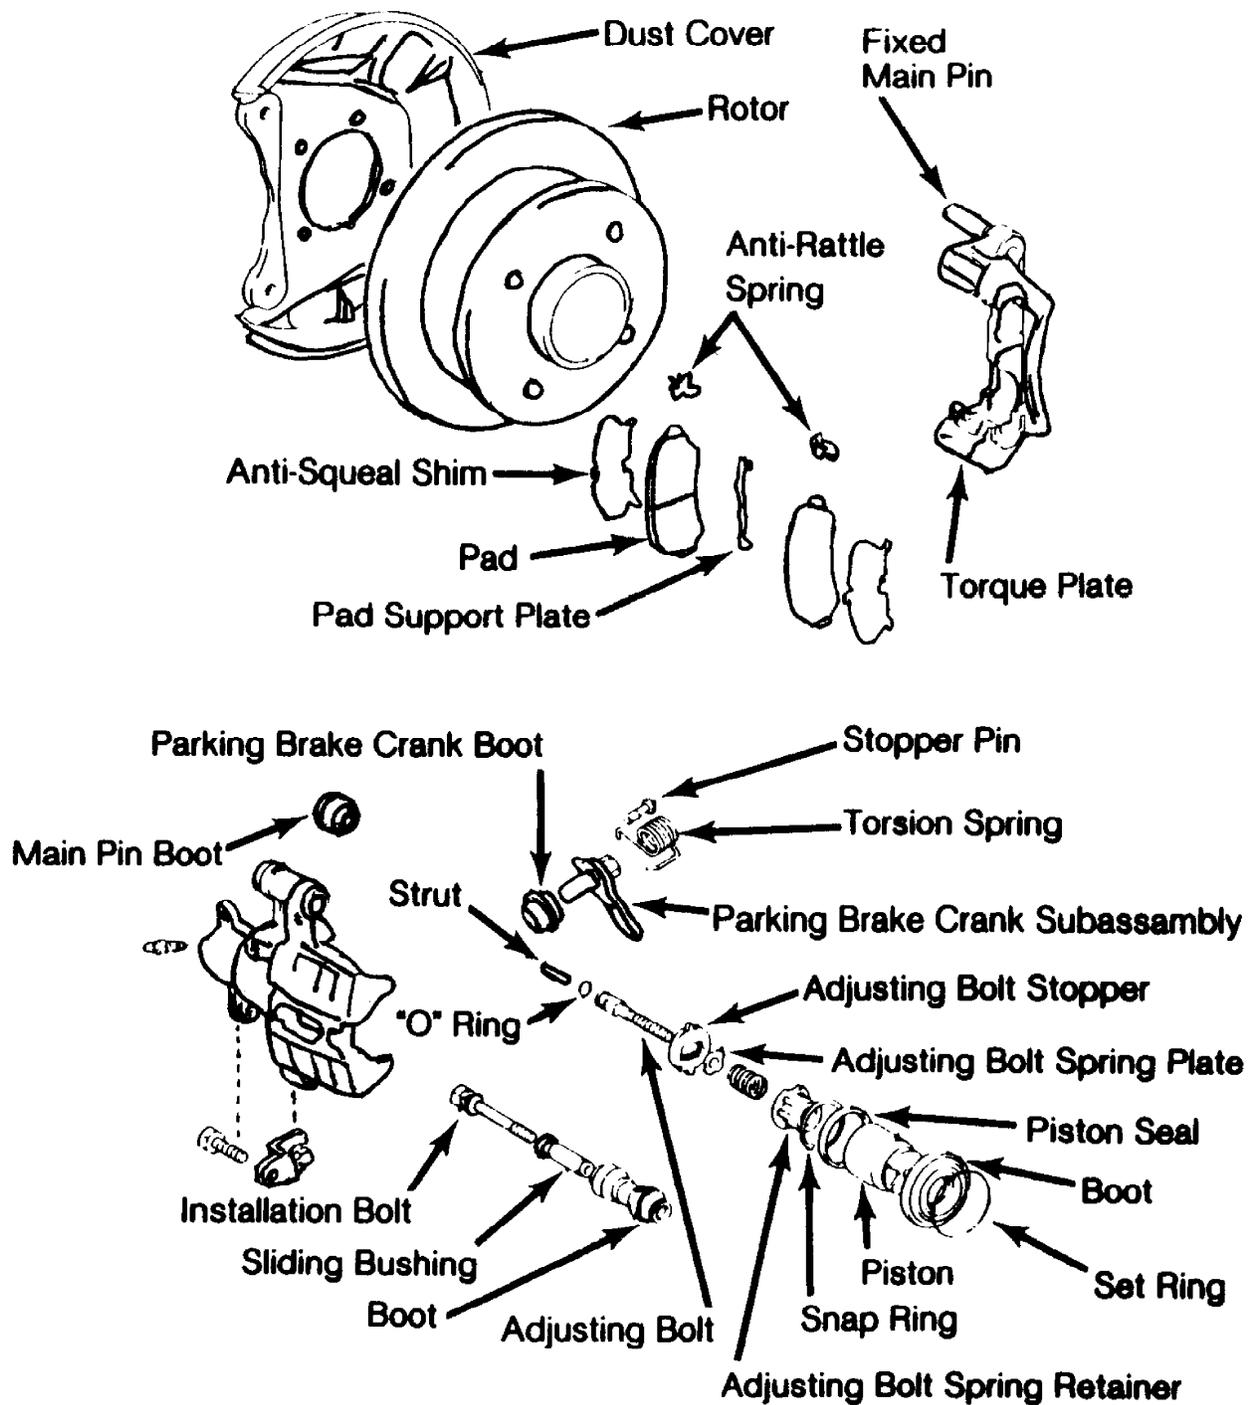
Exploded View Of Rear Caliper With Integral Parking Brake
